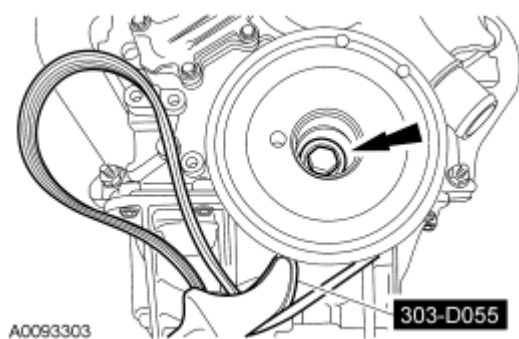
Holding Crankshaft Pulley Using Special Tool
